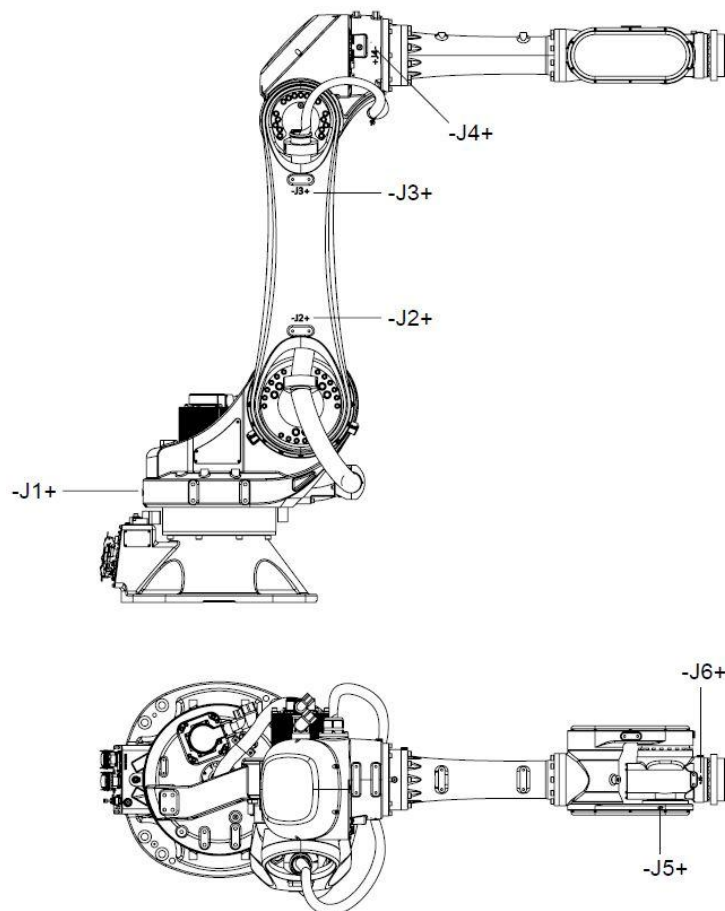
Axis Direction Labels on the RX3-A650-2260/RX3-A680-2260 Operating Machine
